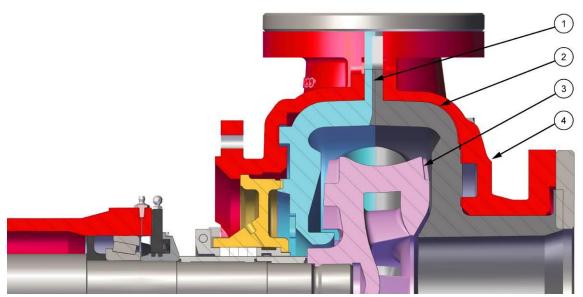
Two Part Rubber. Fitting Frame Plate Liner, Cover Plate Liner, Impeller and Cover Plate.
